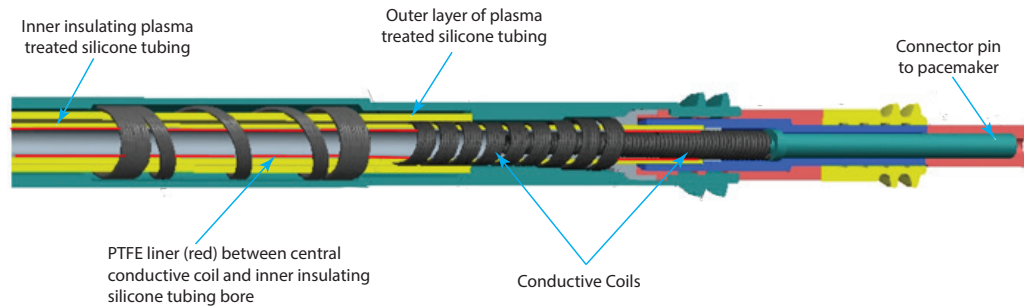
A longitudinal-section of the proximal segment showing silicone tubing locations
